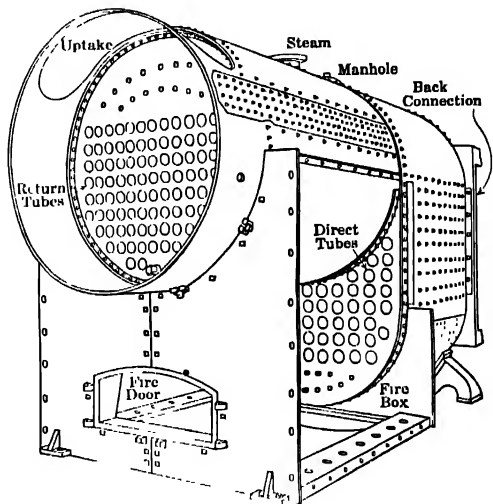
Return Tubular Portable Fire-box Boiler. (Side Plates Removed to Show Furnace Construction.)
